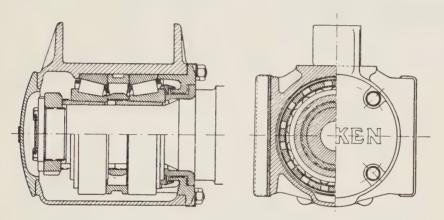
Timken double tapered roller bearing box (outside type), with single row of rollers, kept in position by split conical sleeves, oil lubricated (light carriages of the S. N. C. F.).
